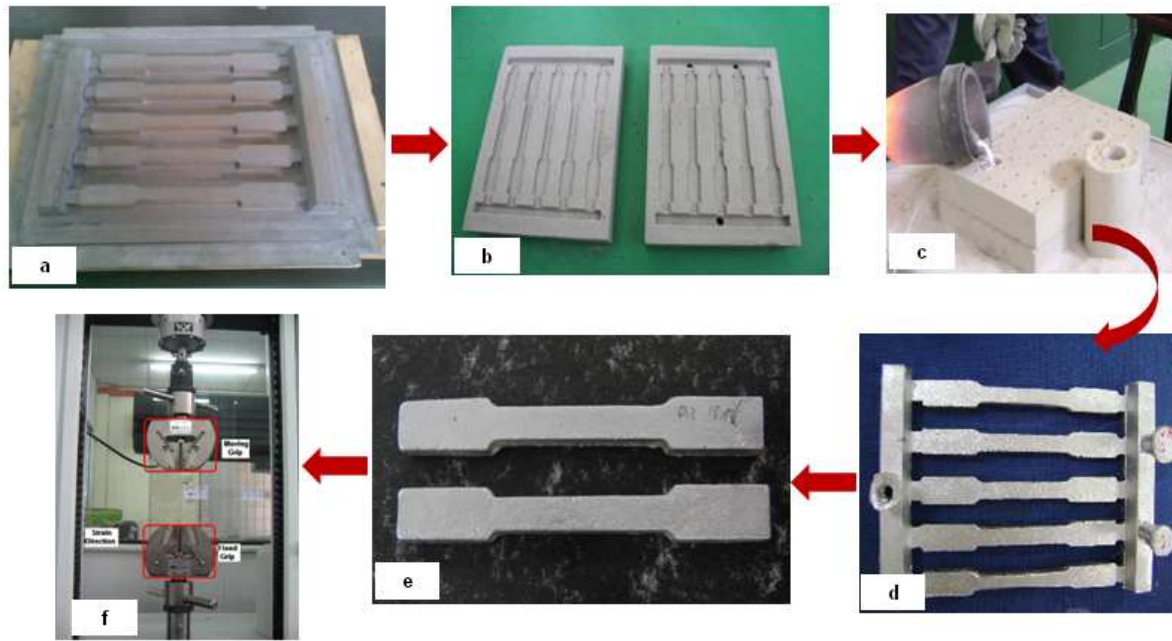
The casting processing steps; (a) Pattern of mould (b) sand mould : drag and copper (c) melting and pouring in the sand mould (d) tensile specimens with gating system (e) tensile specimen after removing of gating systems (f) tensile testing.
